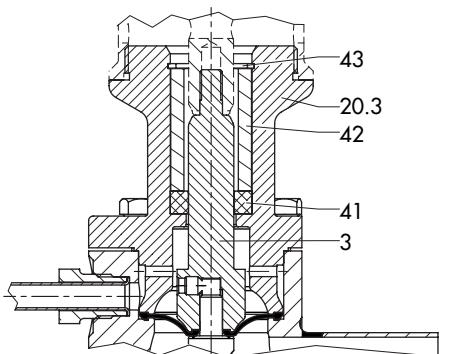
Stem seal (micro-flow valve version without packing)
